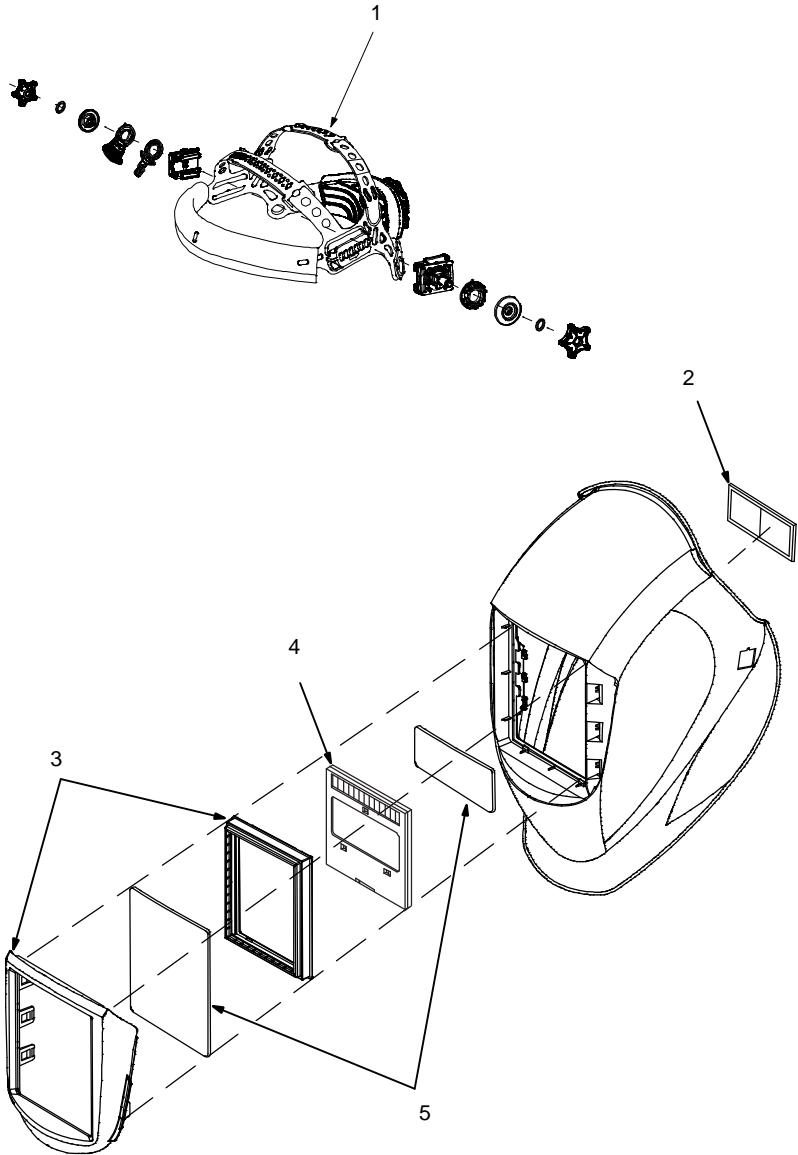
Impact Series Auto-Darkening Welding Helmet
